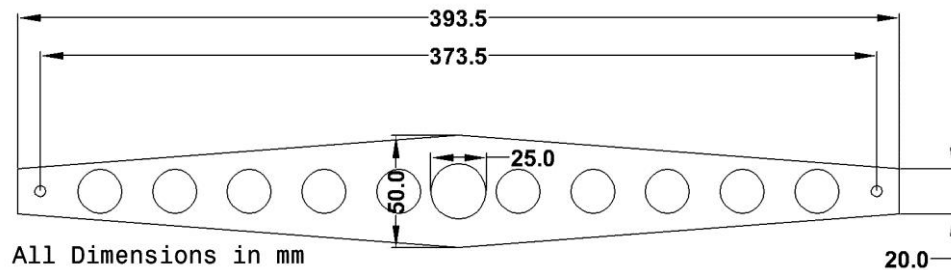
Cross Frame of the Mobile Robot Suspension
